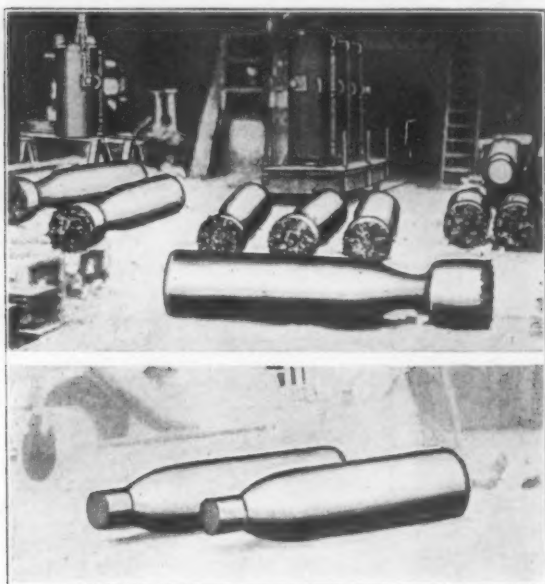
Finished and Unfinished Semi-Steel Shell Castings
